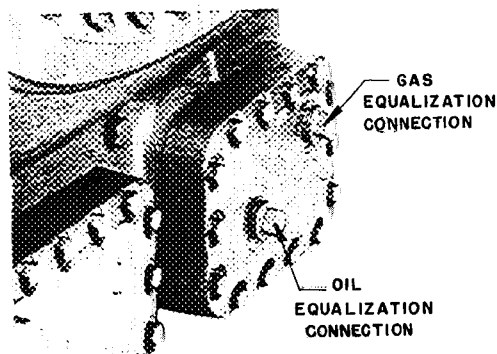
SPECIAL HAND HOLE COVER PLATE FOR INTERCONNECTION
